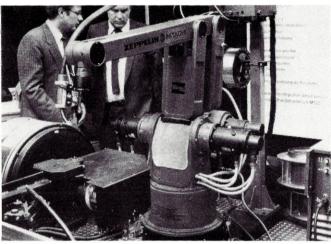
This Zeppelin-Hitachi manipulator, going through the motions of a welding operation, was typical of dozens of Hannover Fair exhibits in Hall 13, devoted to assembly, handling, and industrial robot equipment.
